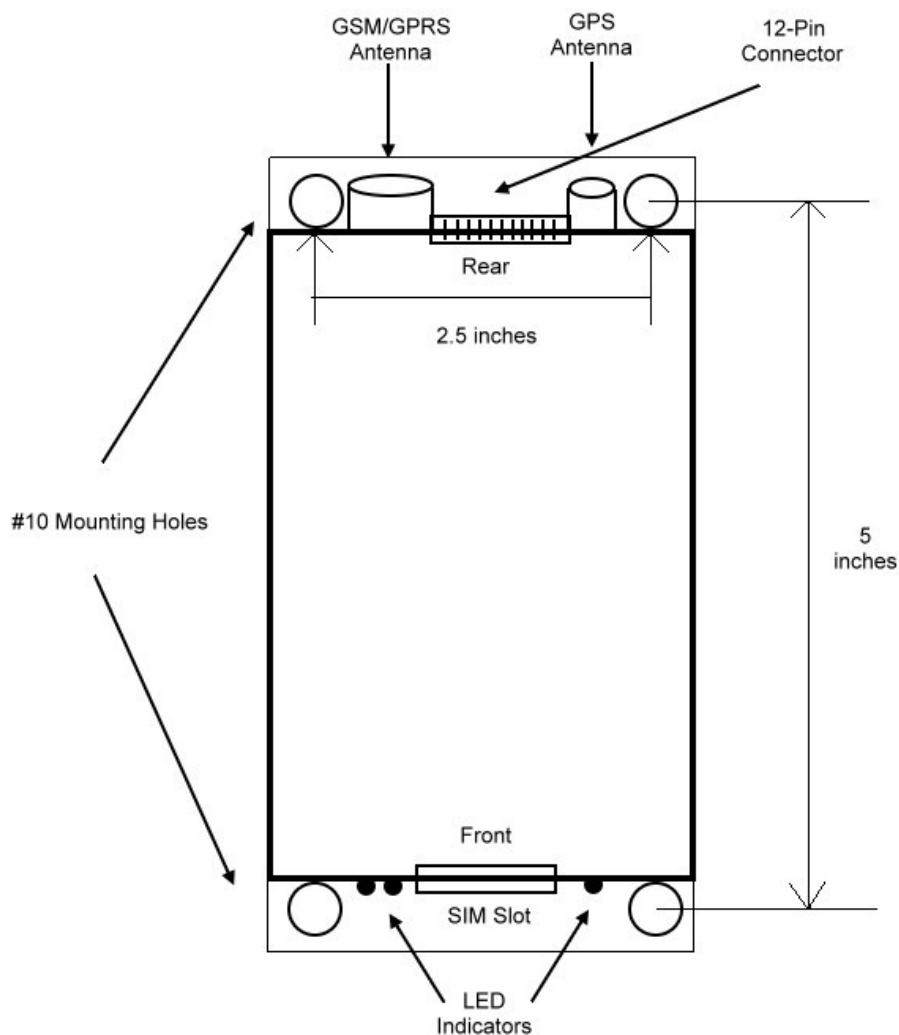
Mounting dimensions of the EVOLUTION (Shown with mounting plate)
